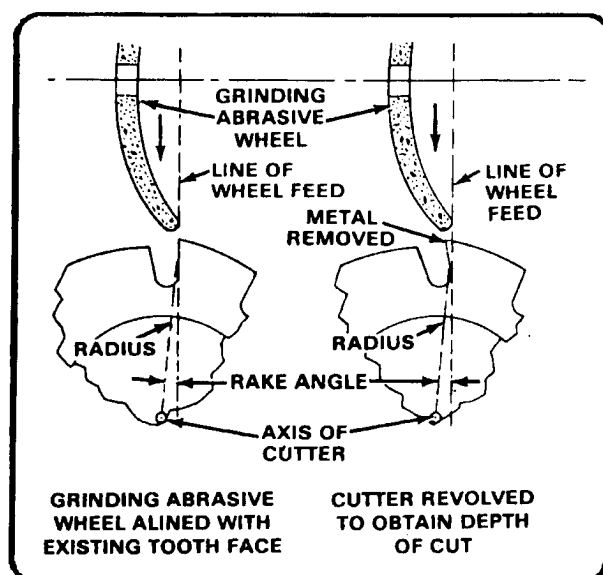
Aligning formed milling cutter and grinding wheel.
